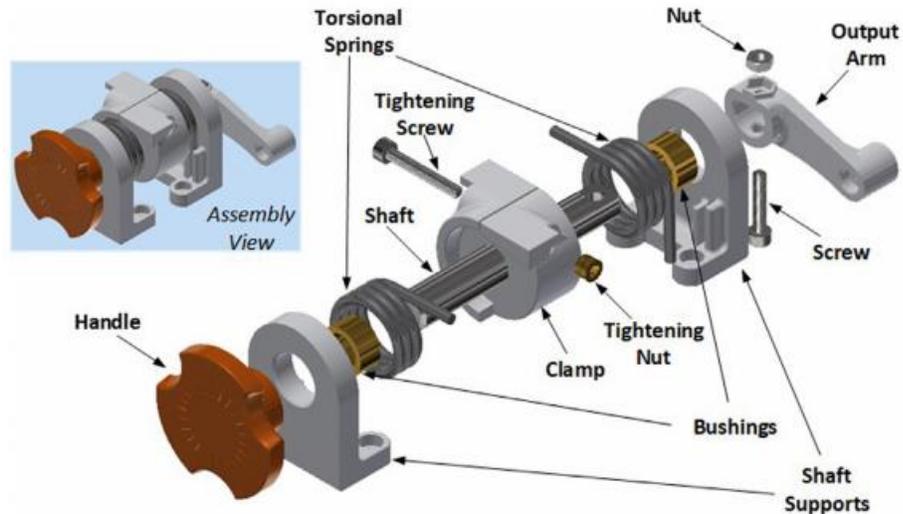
Detailed Exploded View of Spring Assembly. (Zhang, Albee & Agrawal, 2018)
